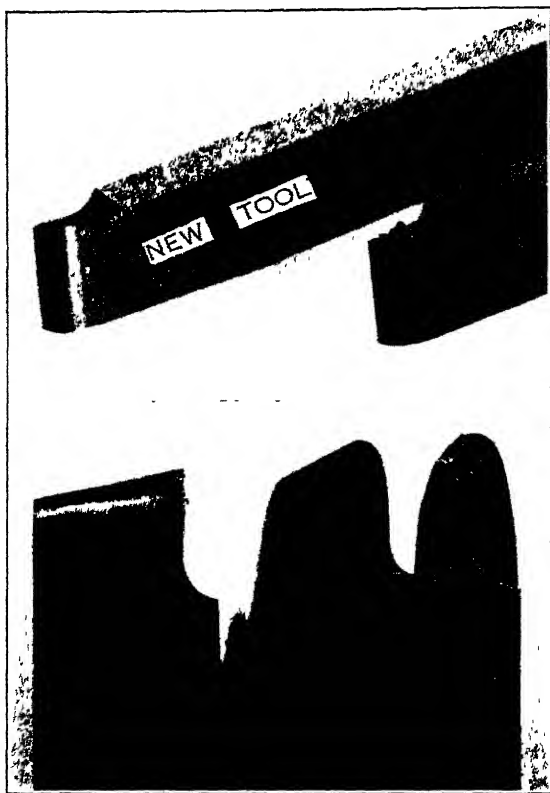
TYPICAL FAILURES OF ROUGHING LATHE TOOLS IN BREAKDOWN TESTS
